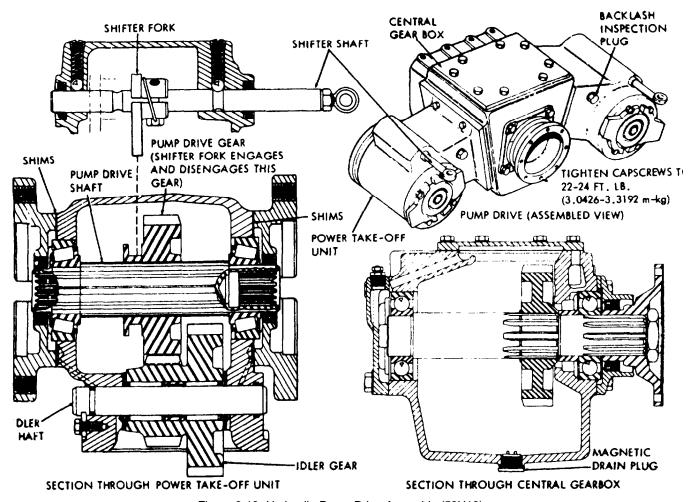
Hydraulic Pump Drive Assembly (53U13)
